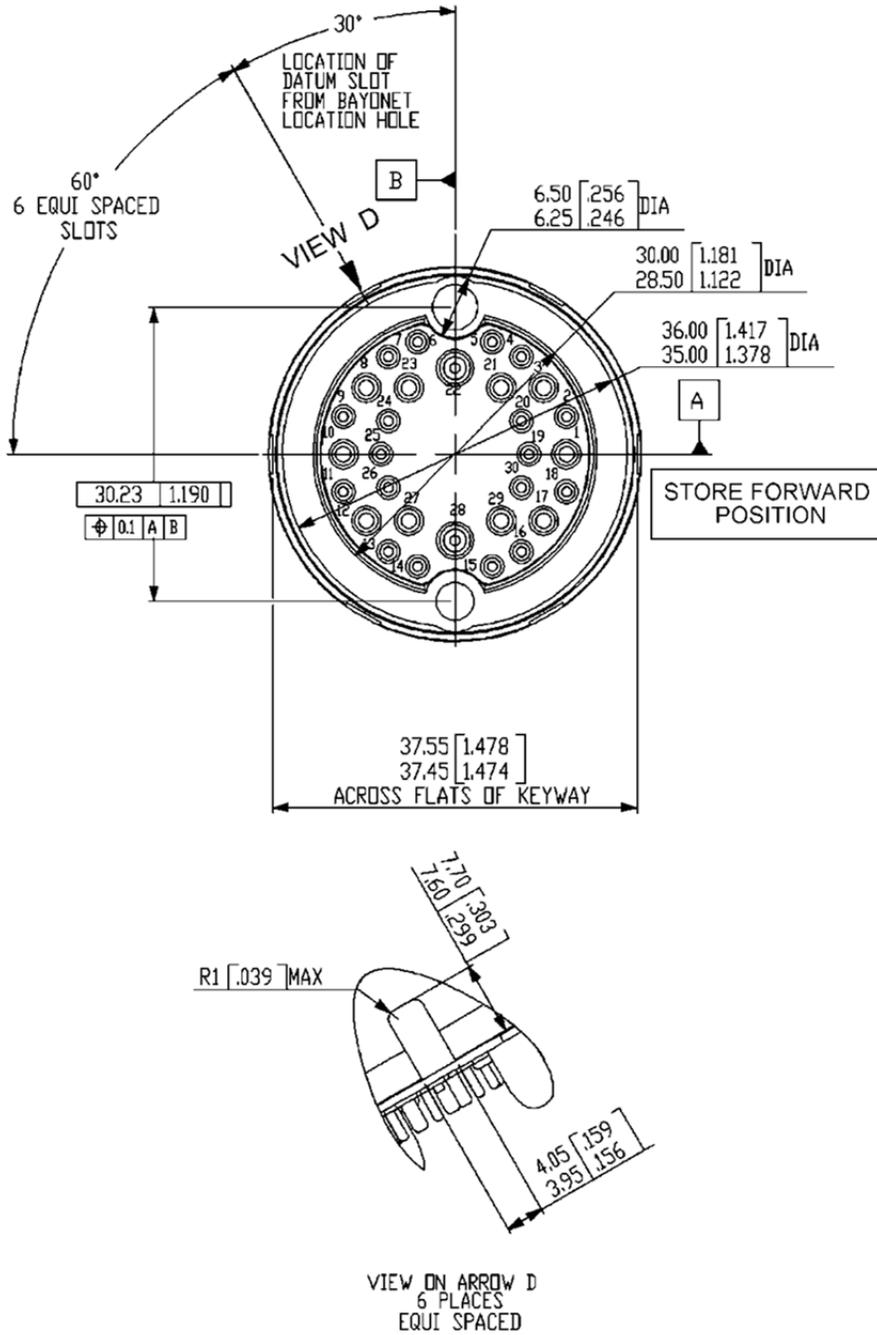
Buffer adapter plug, type 1 - Continued.
